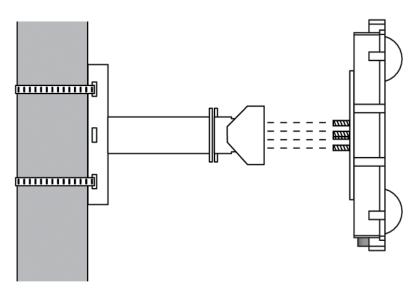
Attaching the Sensor to the Mounting Bracket
